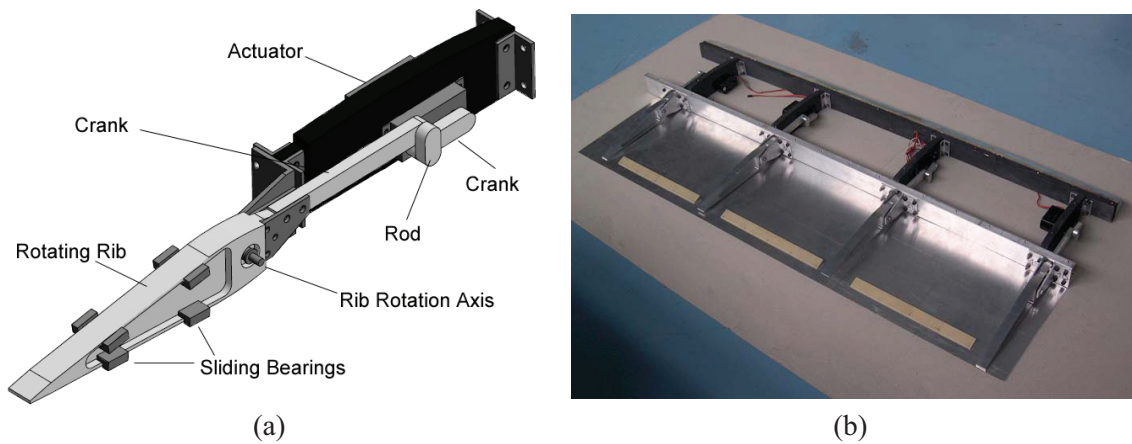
Rotating rib concept: (a) rib details and (b) proof-of-concept wing section. [28]
